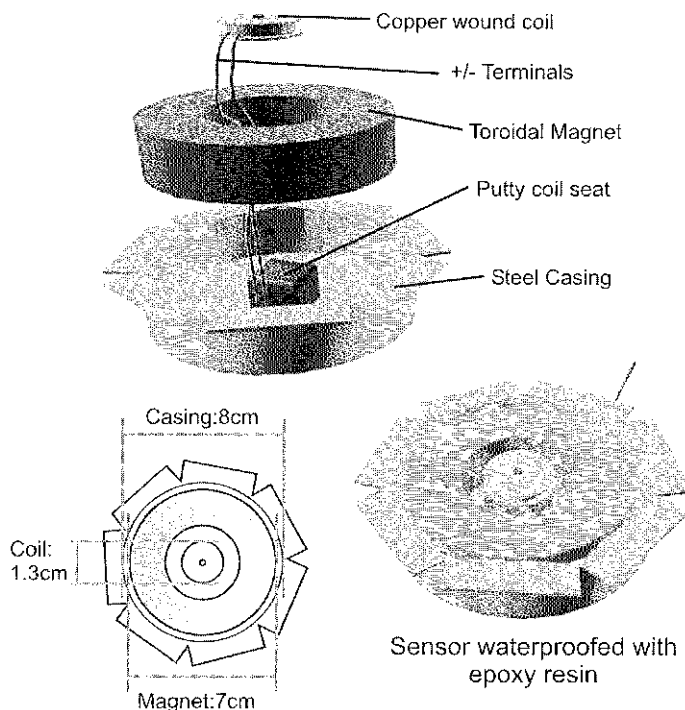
The Bed load Movement Detector sensor shown in exploded view, sensor dimensions, and the assembled product.
